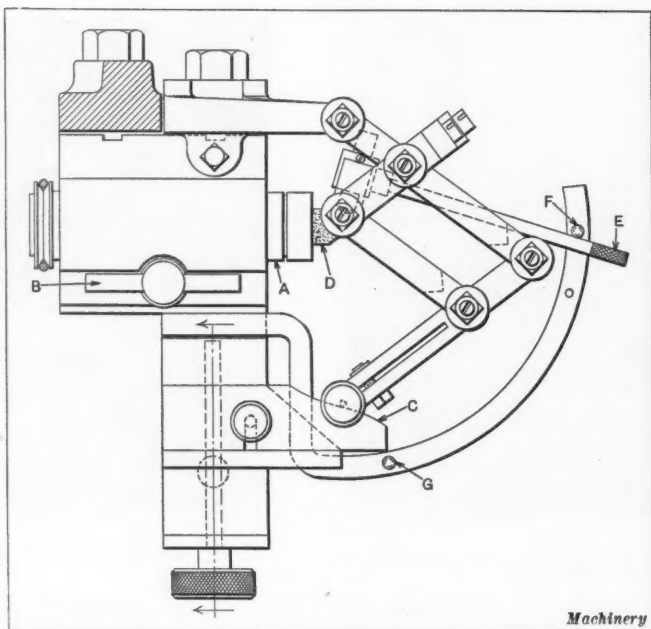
Arrangement of Master Form, Pantograph, and Diamond on Grinding Point Truing Machine of Type shown in Fig. 8
